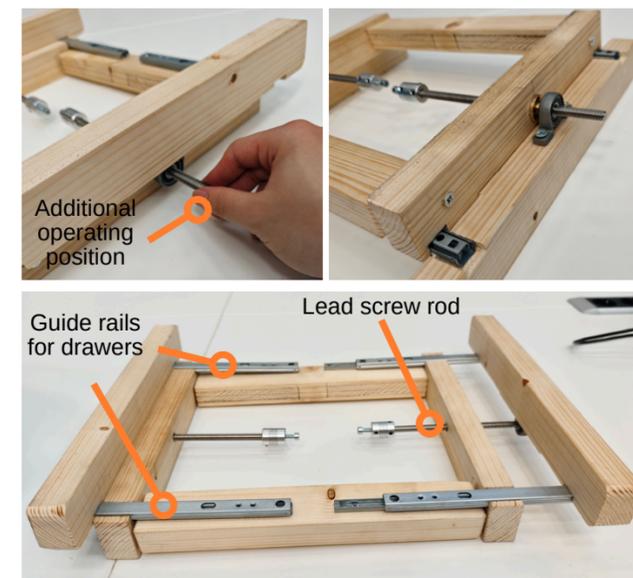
Prototype No.1 of simplified lead screw stepless adjustment structure positioned and reinforced by guide rails.
